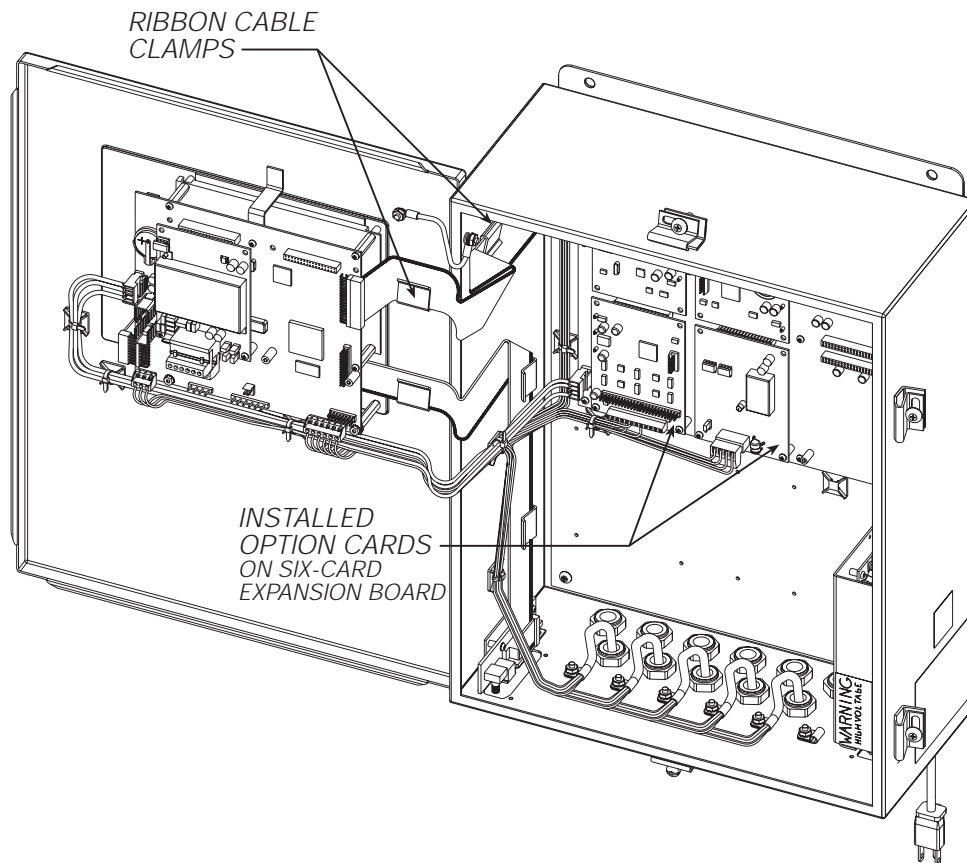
Six-Card Expansion Board Installed in Wall Mount Enclosure, Isometric View
